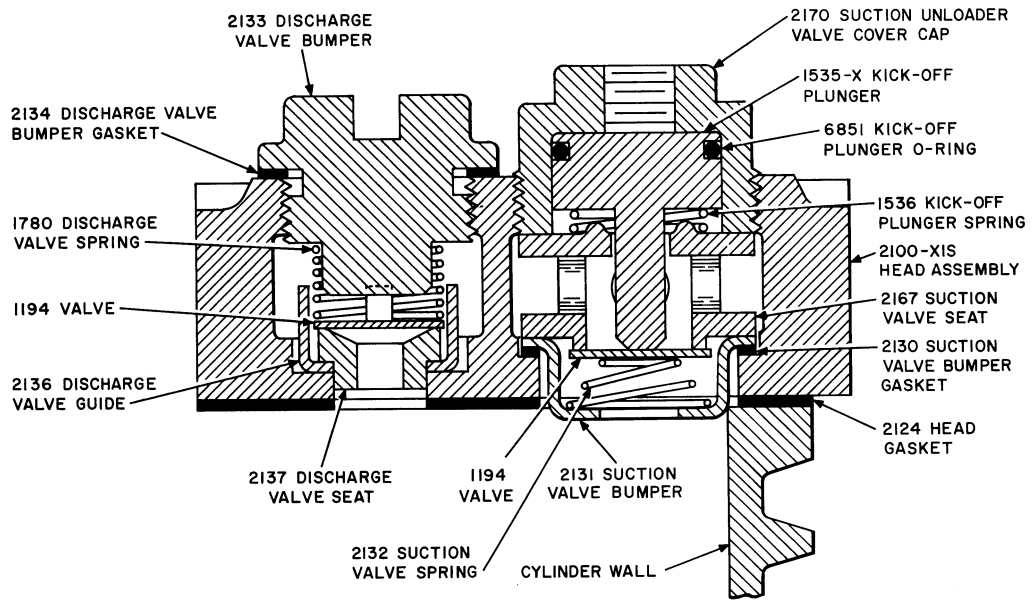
KS-16432 L1 Air Dryer—Air Compressor Head Assembly (Suction Unloader and Discharge Valves)
